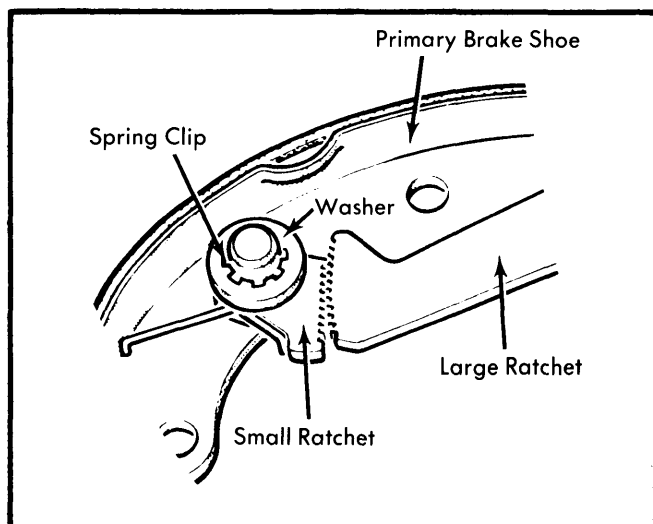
Assembling Large & Small Ratchets on Primary Brake Shoe
